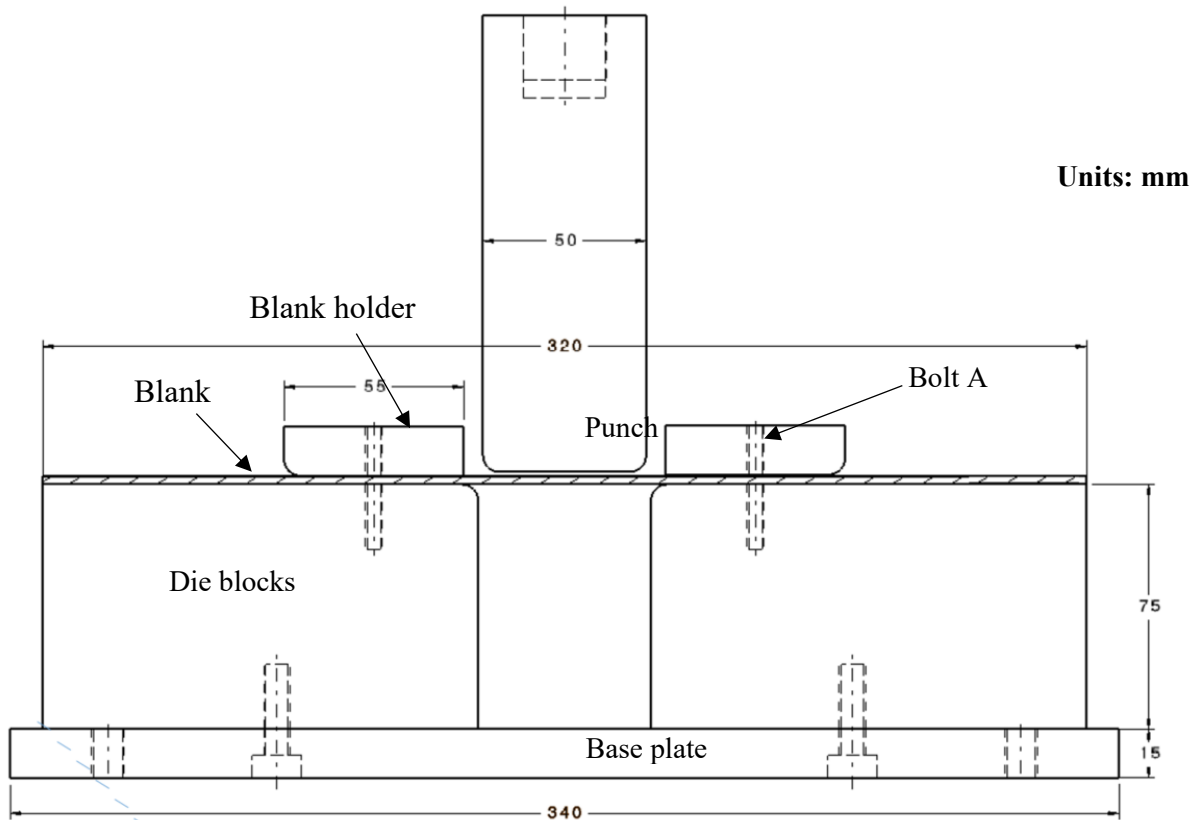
Schematic of the draw bending tool assembly for U-channel forming
